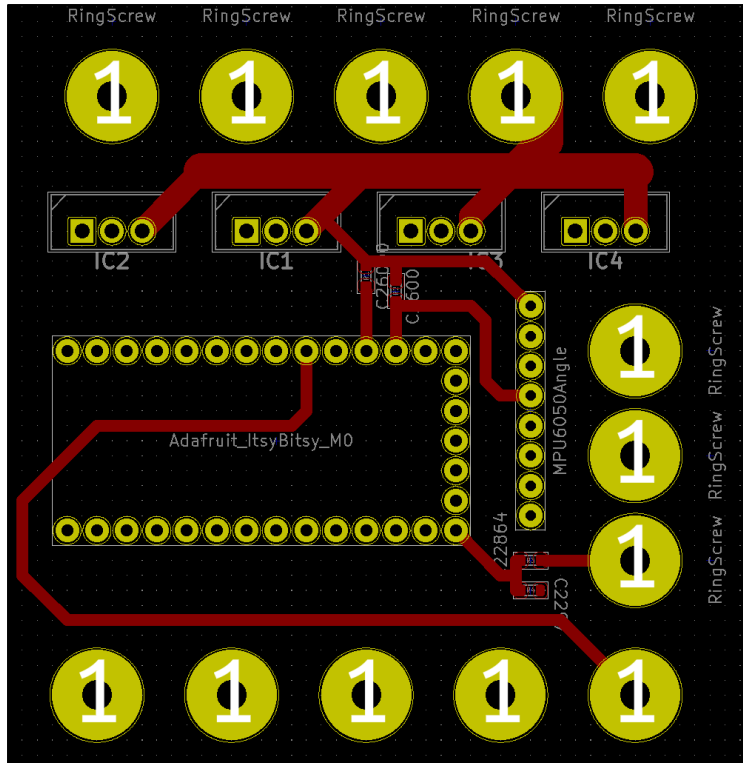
PCB front copper layer, used for 5V, I2C, and the DRS connections
